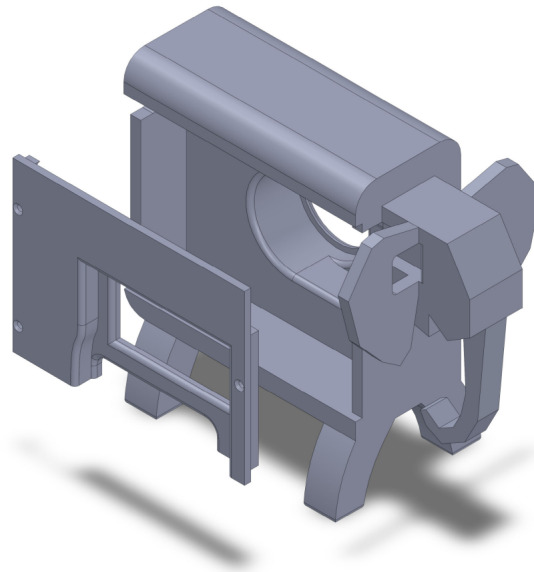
Exploded view of the enclosure assembly showing the modular structure, including front panel, internal supports
